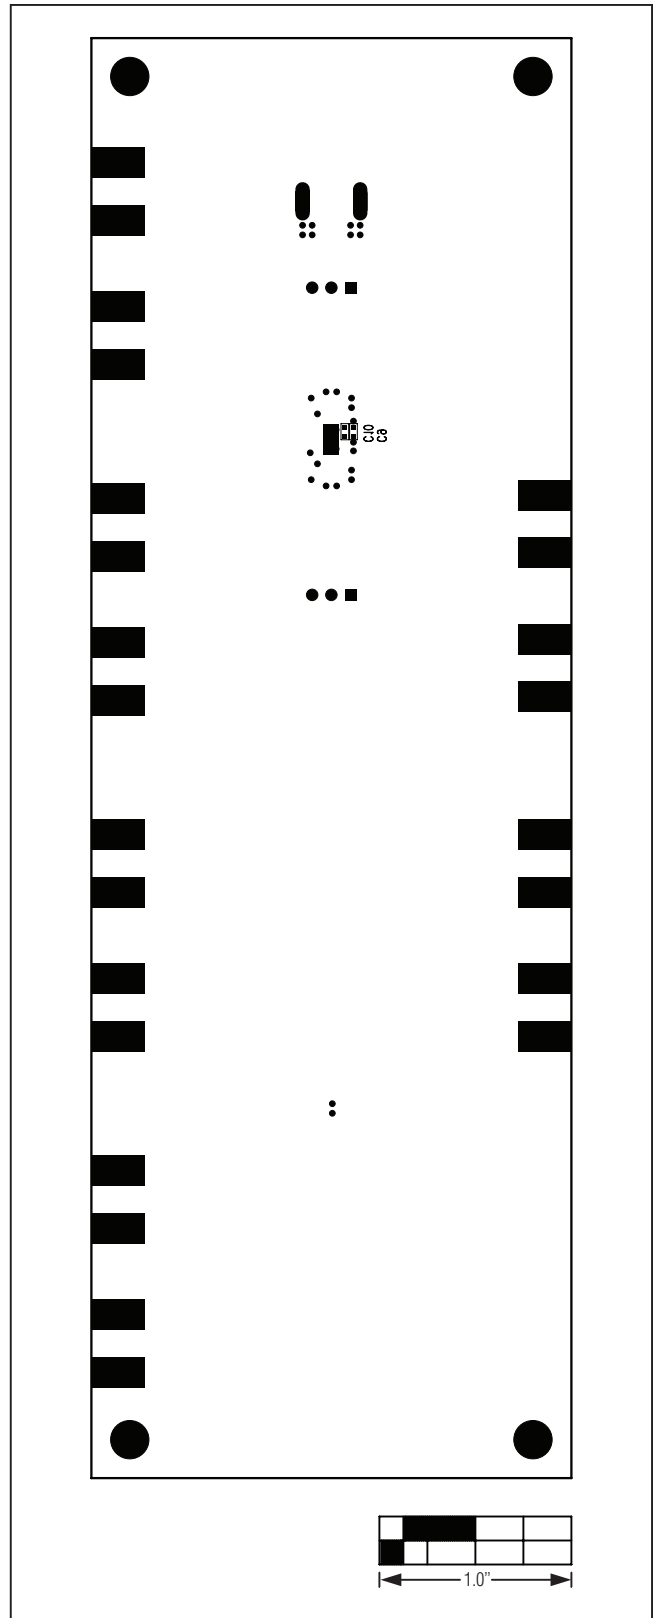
MAX4888B EV Kit Component Placement Guide—Solder Side
